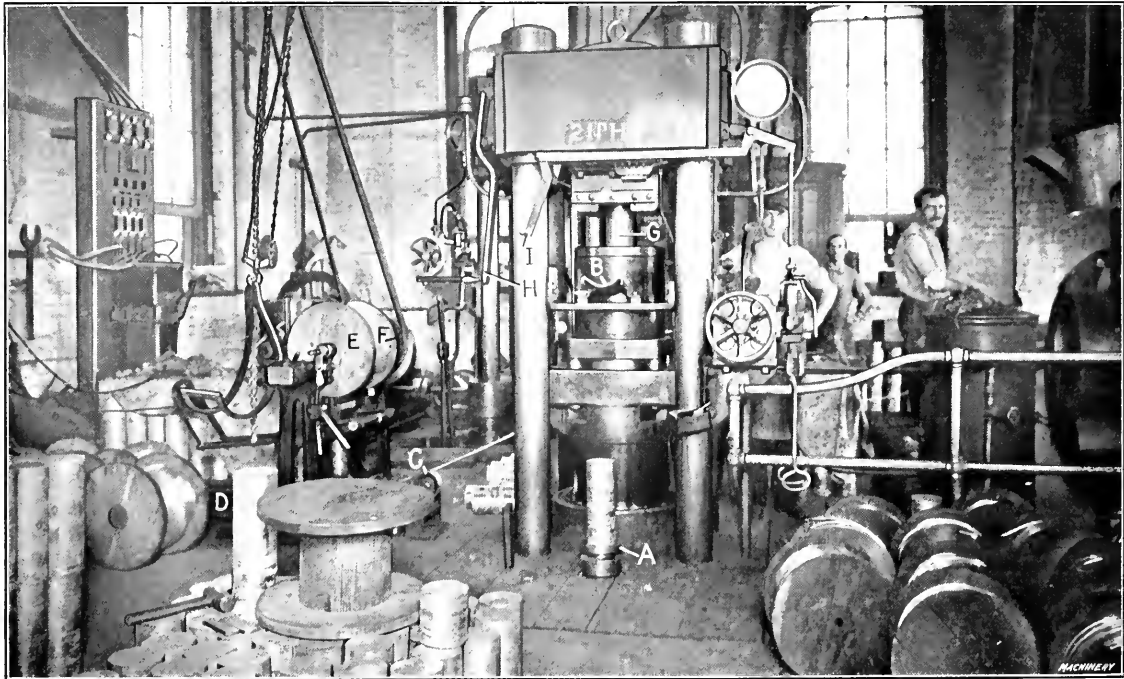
Hydraulic Press for making Lead Wire, which is used as Filling for Spitzer Bullets
